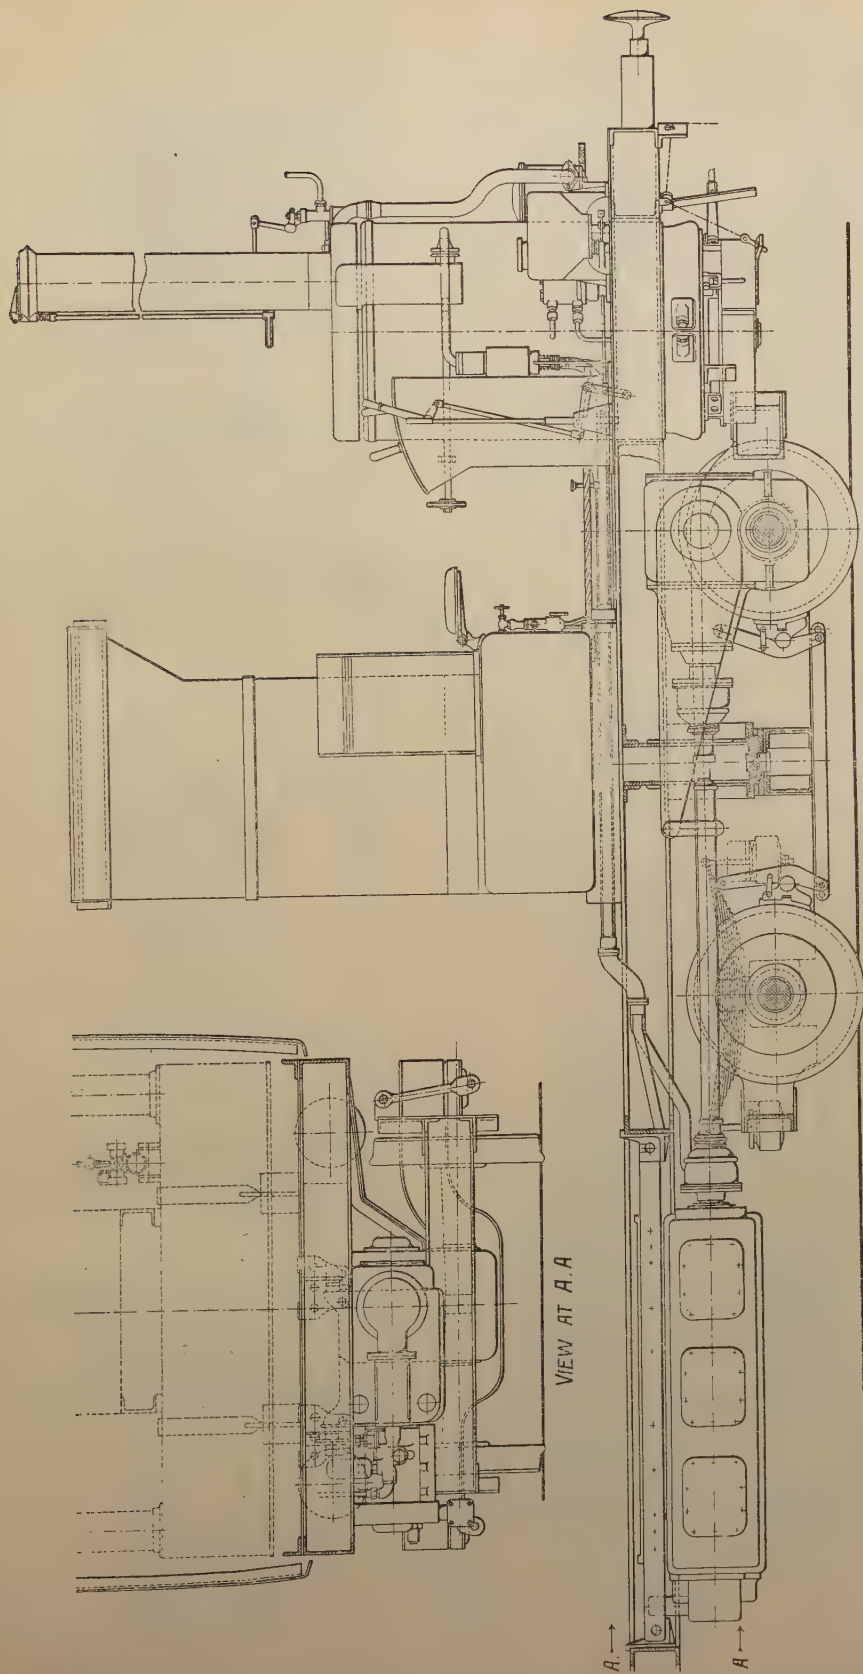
Arrangement of power unit, Sentinel Cammell steam rail car — gear driven.
